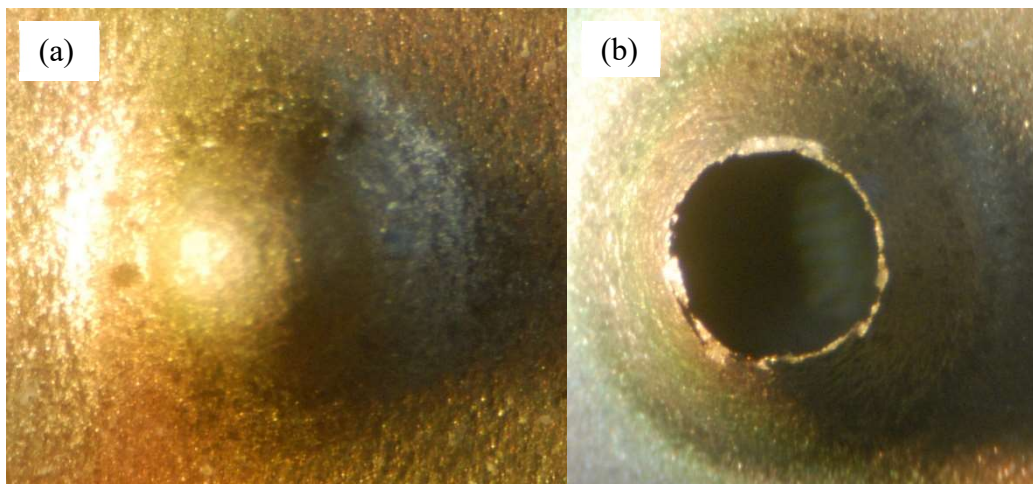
Post-test In718, 1.83 mm backed test specimens at punch displacements of (a) 3.55 mm-no fracture and (b) 5.34 mm - fracture
